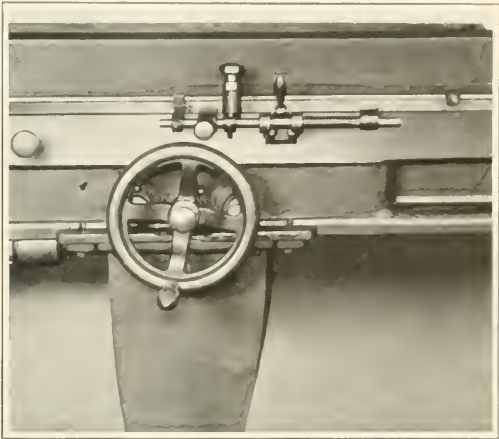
Close View at Center of Bed, showing Feed Reversing Mechanism and Wheel for Rapid Hand Traverse
